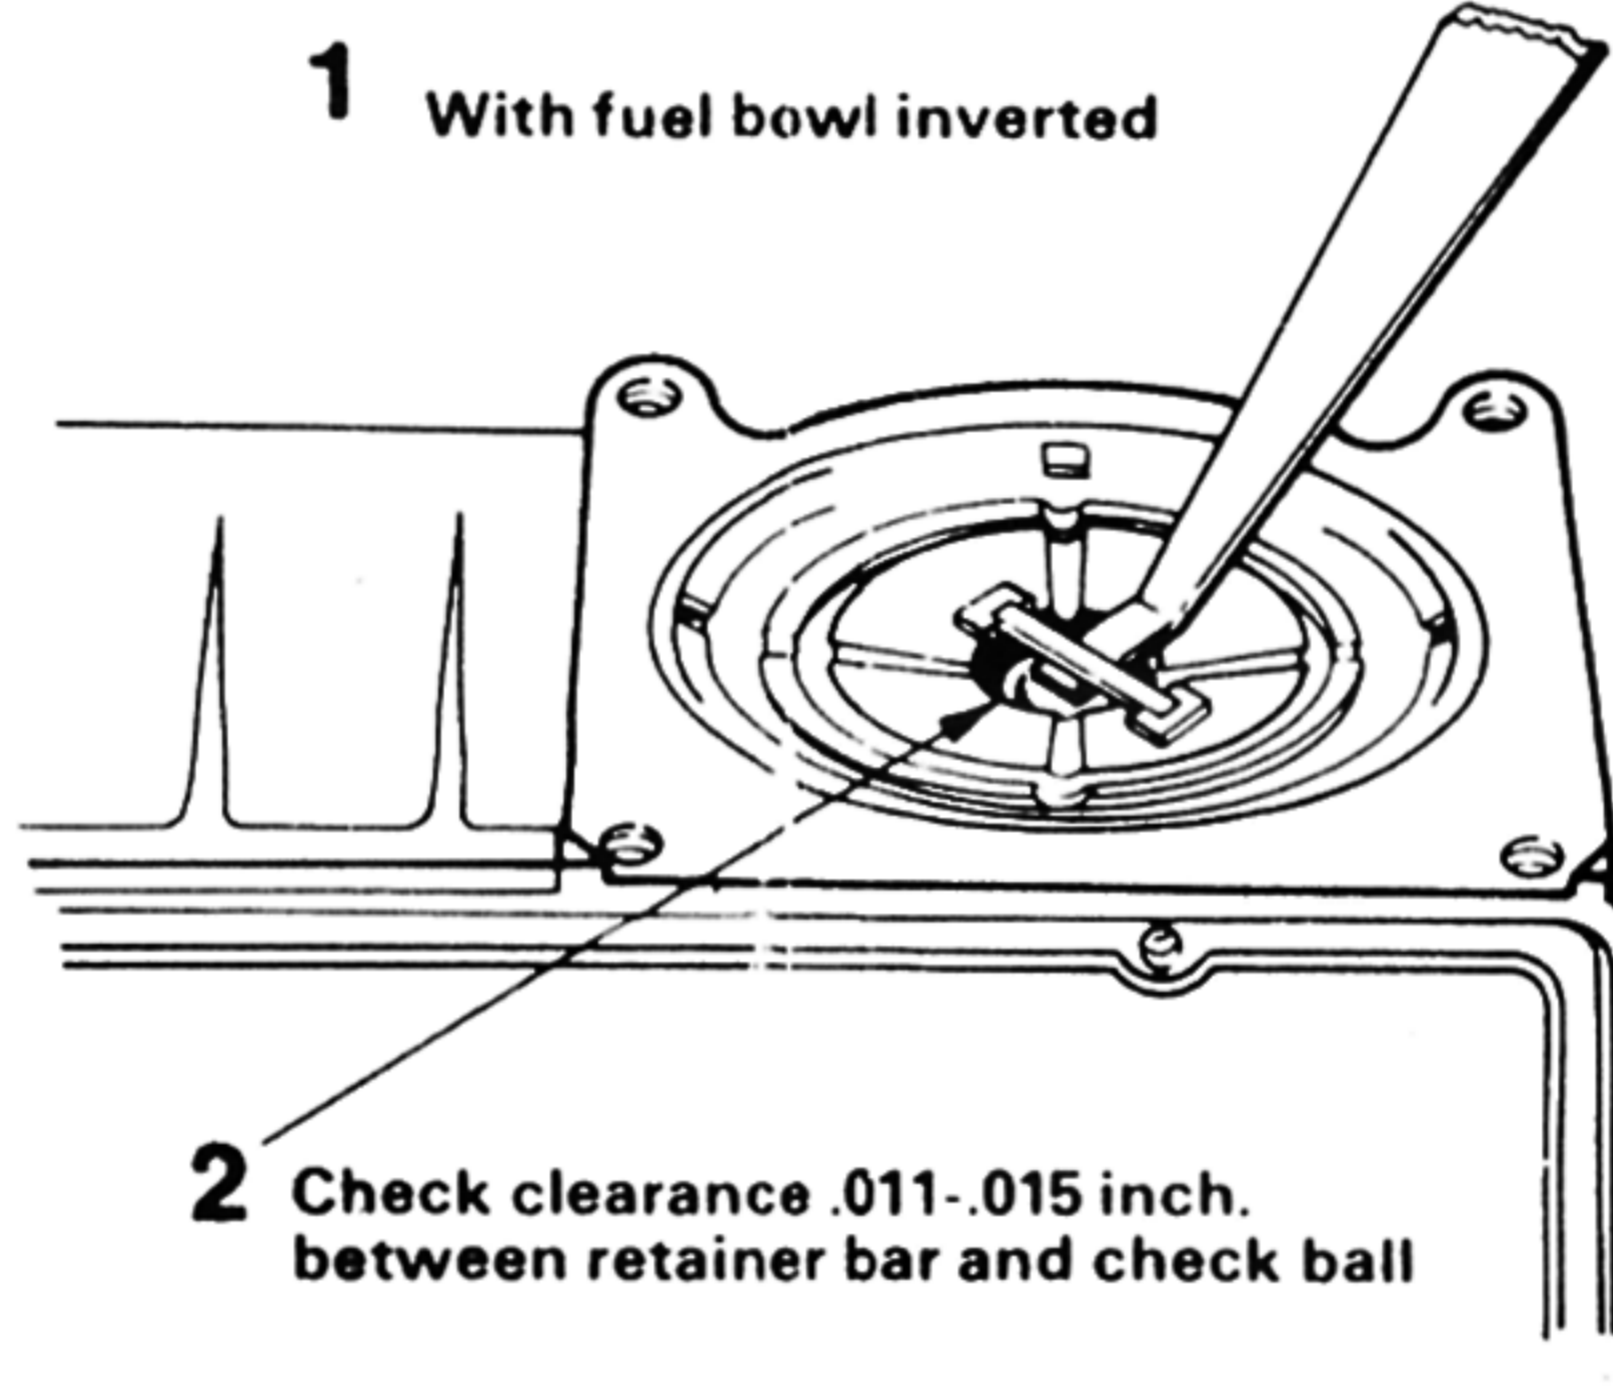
PUMP INTAKE CHECK BALL ADJUSTMENT
